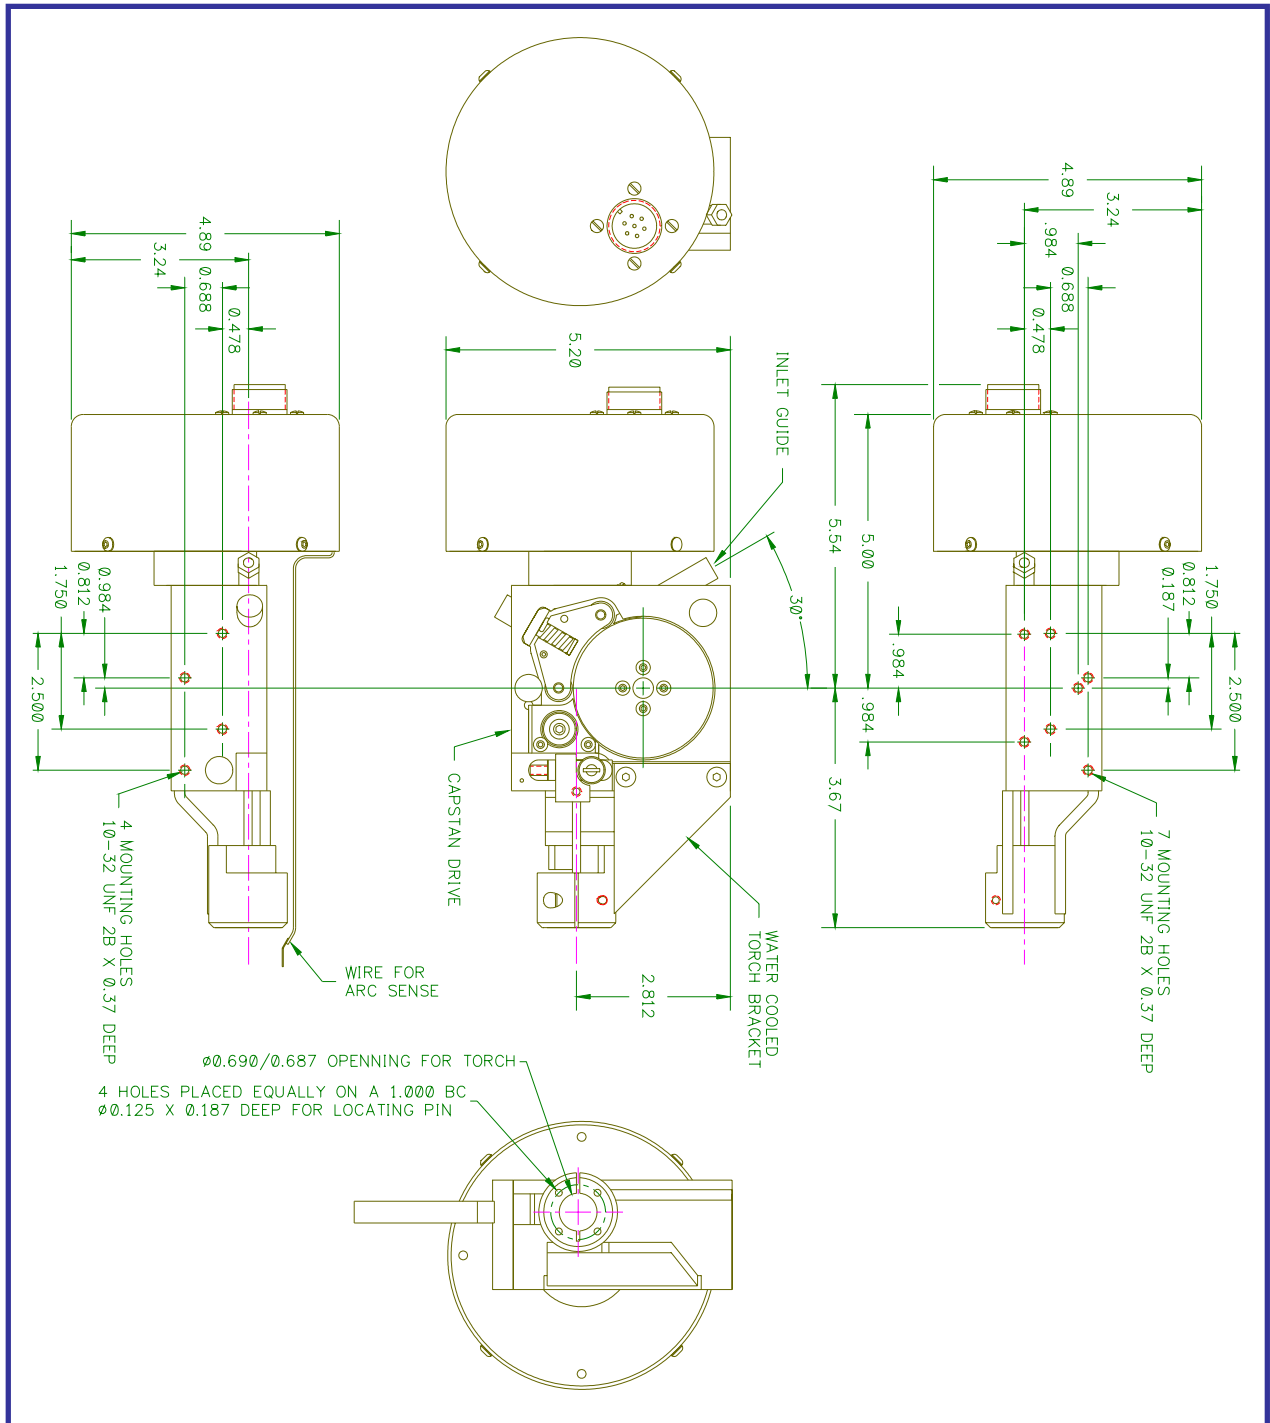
Opposite Hand Capstan Mounting Dimensions
